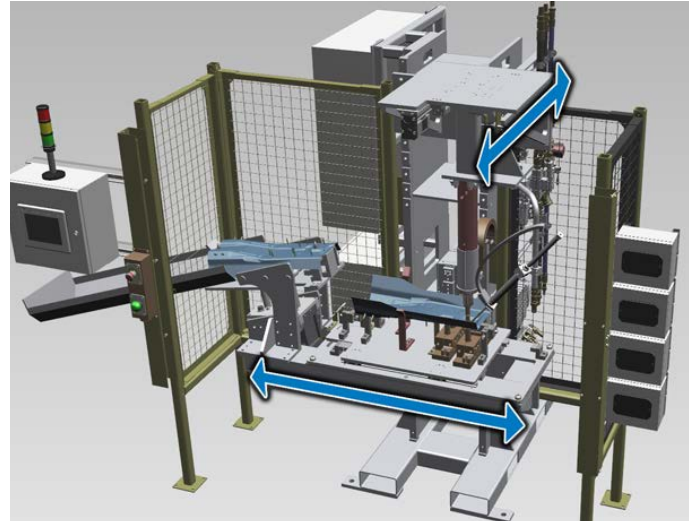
Part locked in fixed position and rodless linear actuators move Projection weld actuator and ServoPlace actuator into position.
